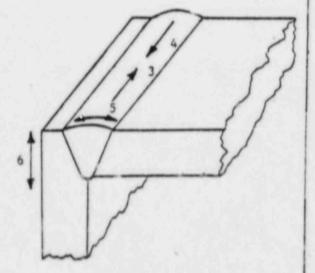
EXAMPLE OF WELD AREA SCANNING
